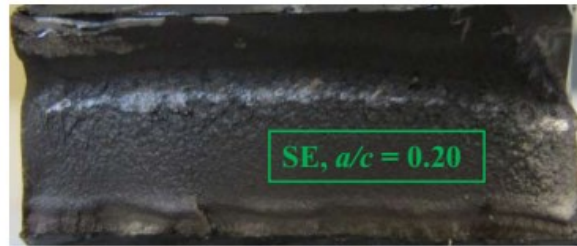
Fracture surfaces for as-welded A514 steel specimens under CA loading
